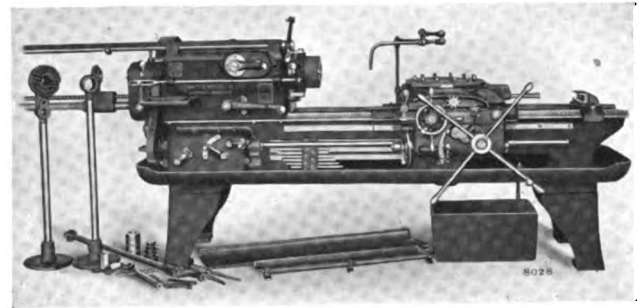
Pratt & Whitney $2\frac{1}{2}$ x 26-Inch Turntable Lathe
